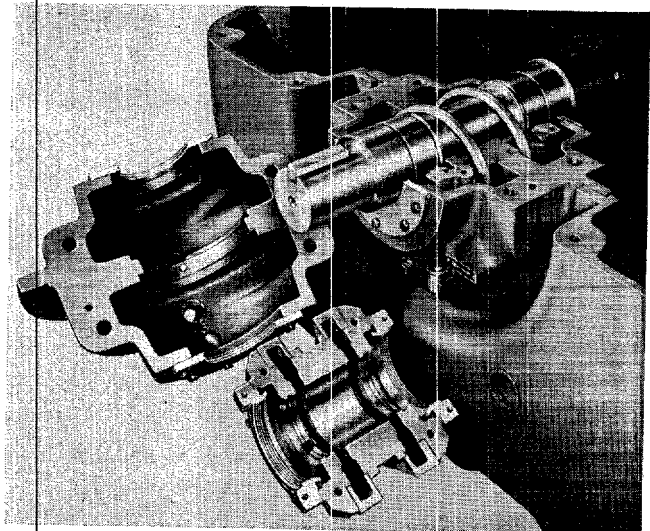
Partially dismantled capsule-type sleeve bearing of same type as that shown in Fig. H-33.
